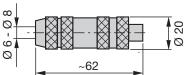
Connector BKS-S105-00 (pin) for BUS OUT
